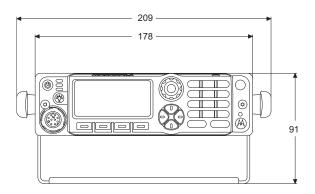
Front View of O7 Control Head with Remote Mount and Trunnion
